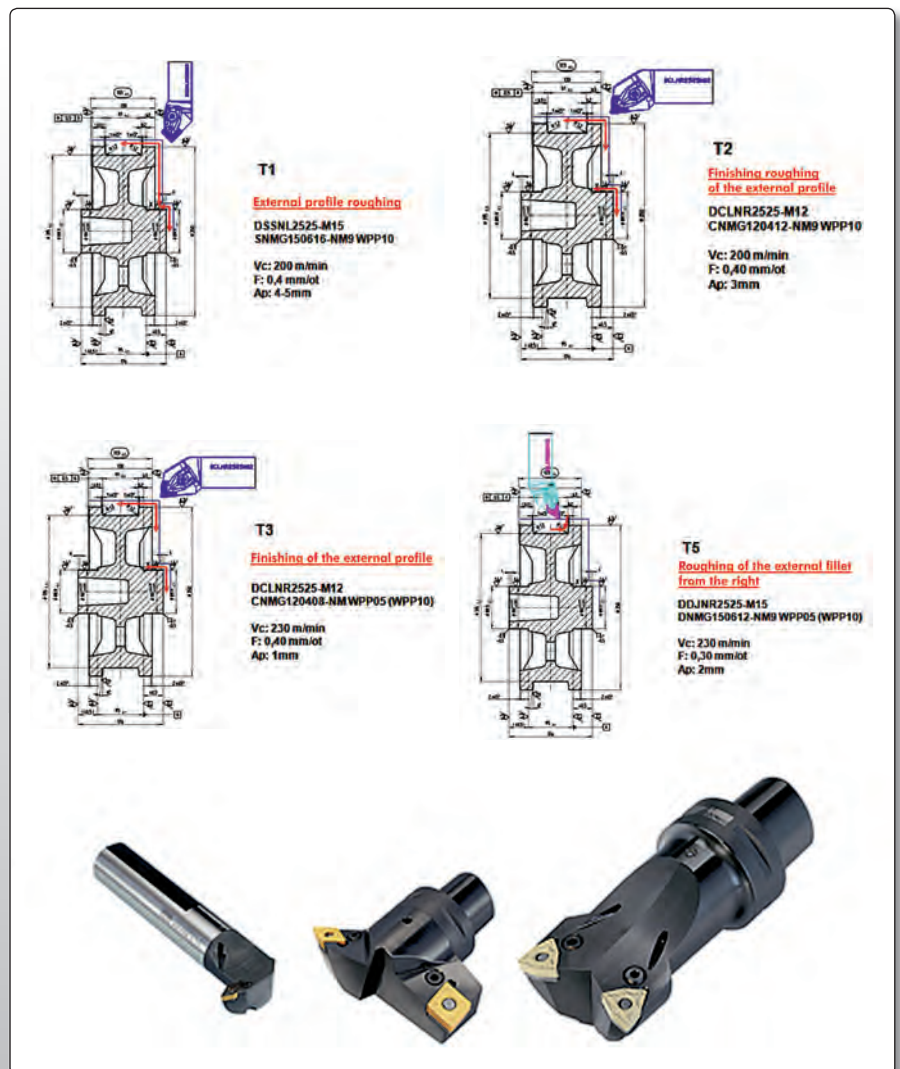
Example of a technological study of the machining of a pulley wheel on a Tajmac-ZPS machine tool [Walter]
